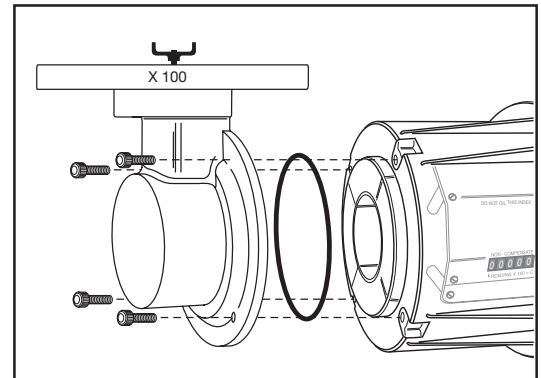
Installing Instrument Drive Kit (optional X10 or X100)
